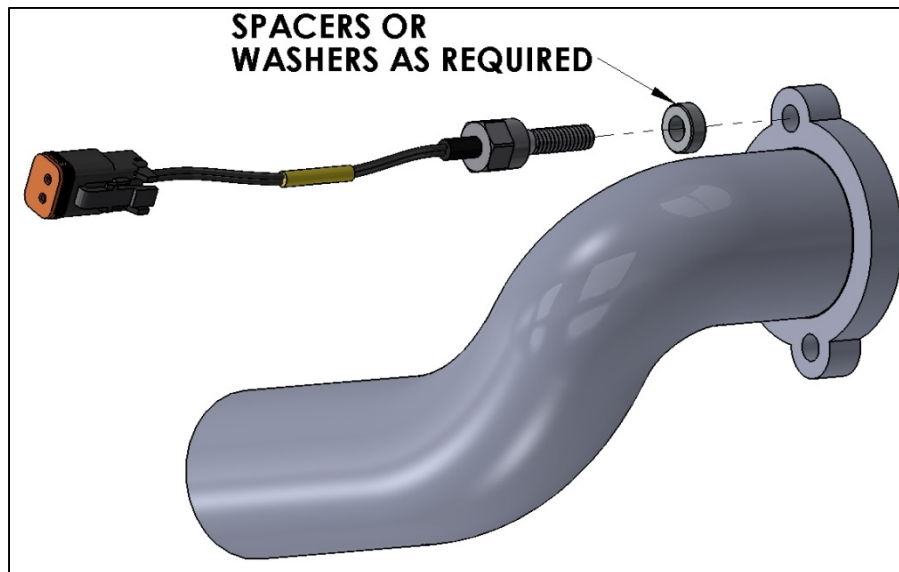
Generic threaded element installation replacing intake-tube flange bolt.
